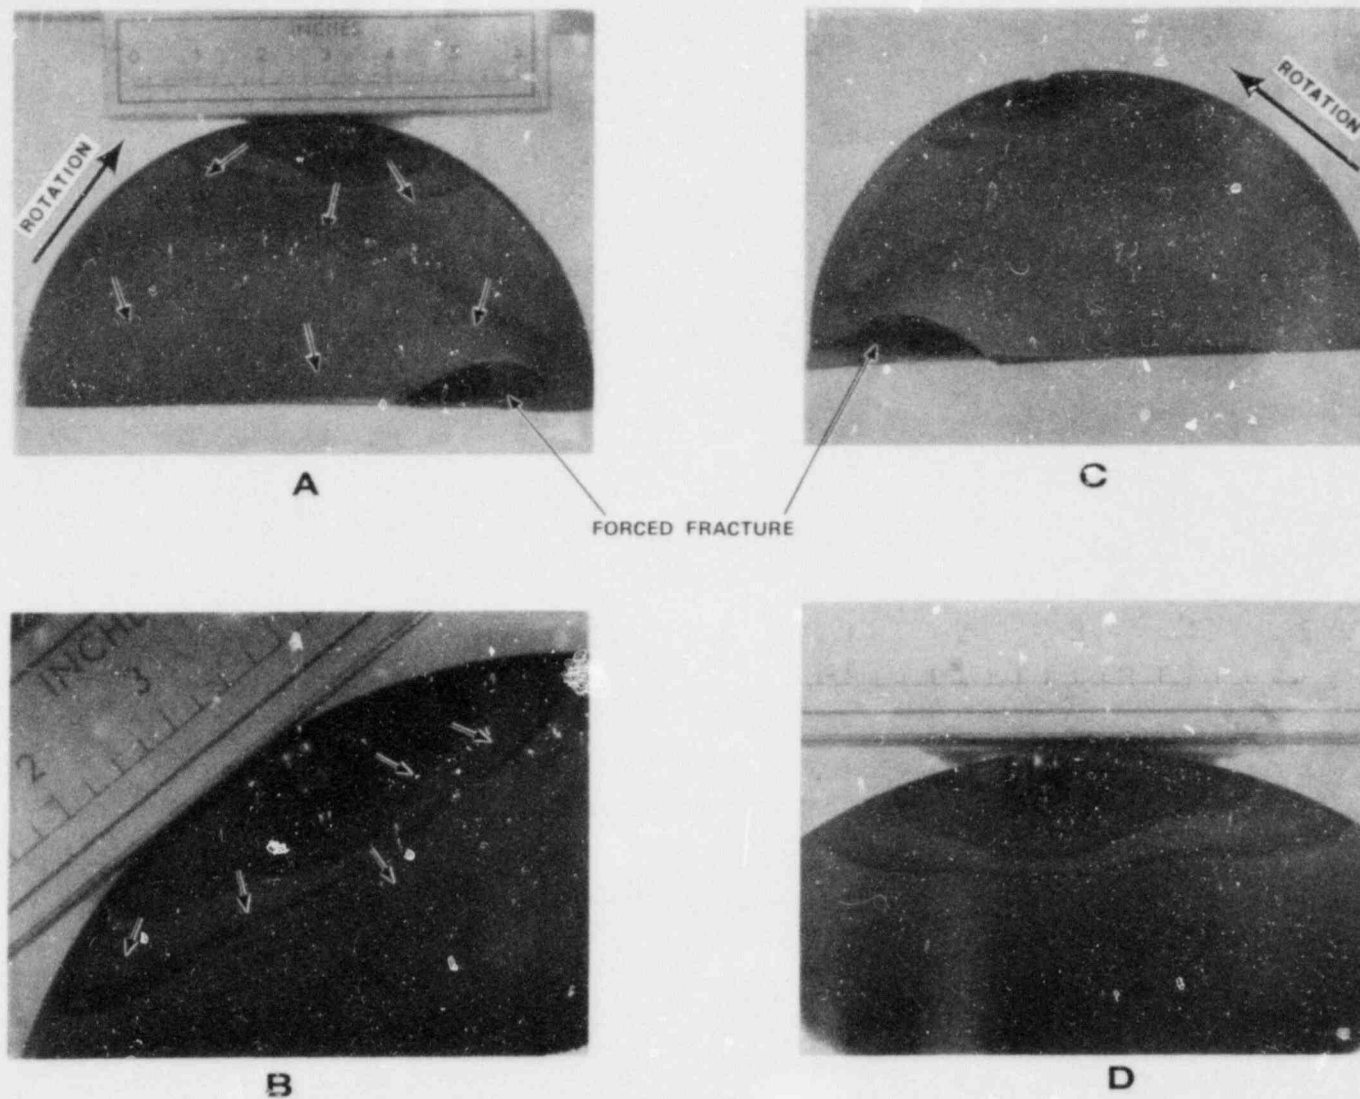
Shaft Fracture Surface on Piece "B" Sections
